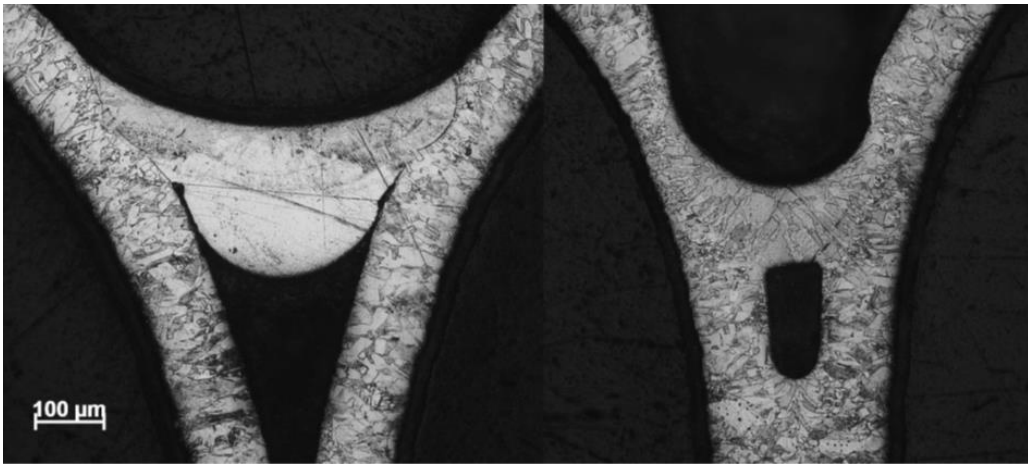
Cross-sections of laser beam-welded capillary tubes of the same diameter / left with filler metal; right without filler metal and with reduced wall thickness
